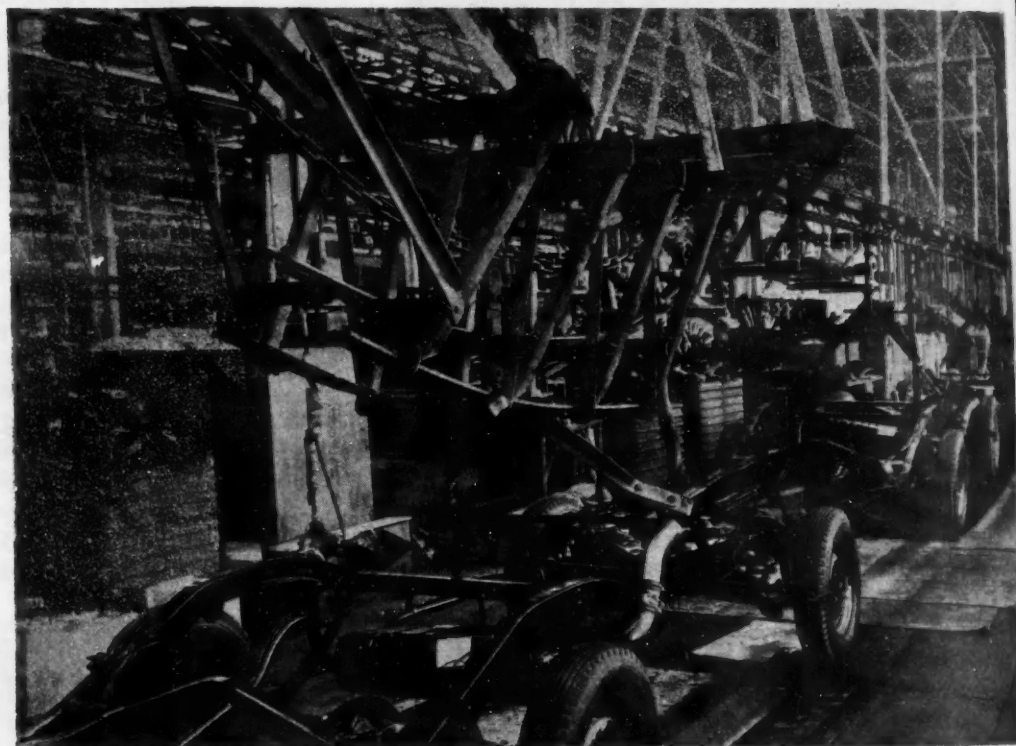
This chute directs the tire-and-wheel assembly to the assembly line. The monorail conveyor above the chute is designed to separate right-hand from left-hand wheels and to dump them in the proper chute
